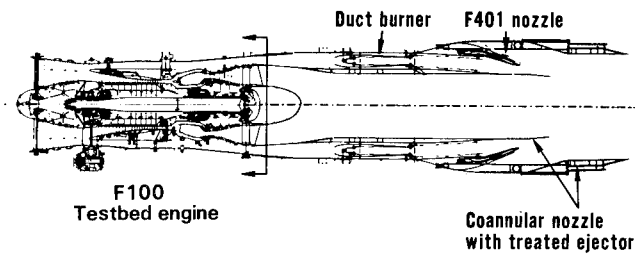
VCE testbed demonstrator configuration using a Pratt & Whitney Aircraft F100 engine as gas generator to develop proper environment of testbed components - the duct burner and coannular nozzle.
